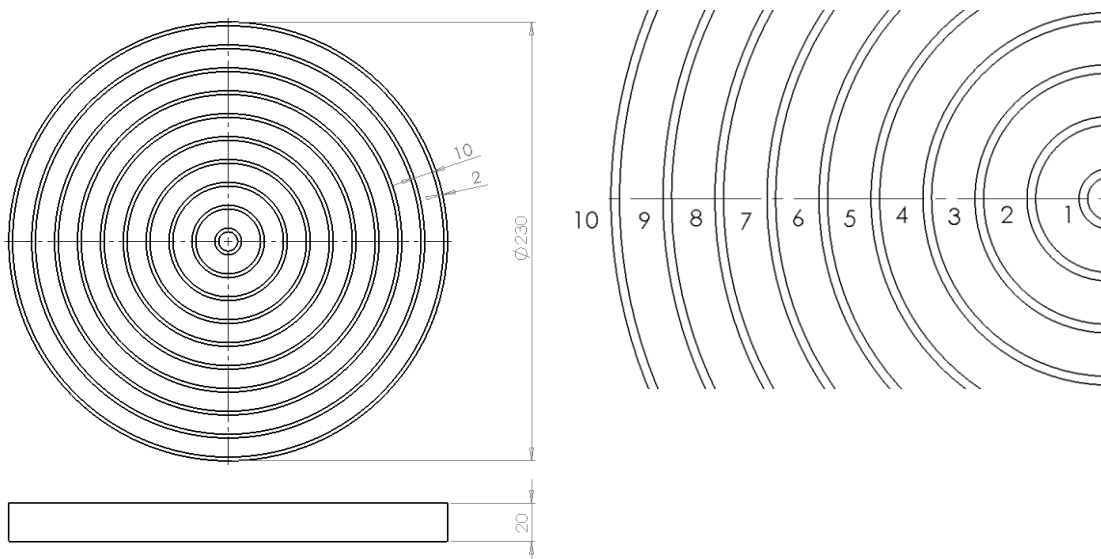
Figure showing CAD for circularity and tolerance benchmarking for a 250x250mm build plate.
